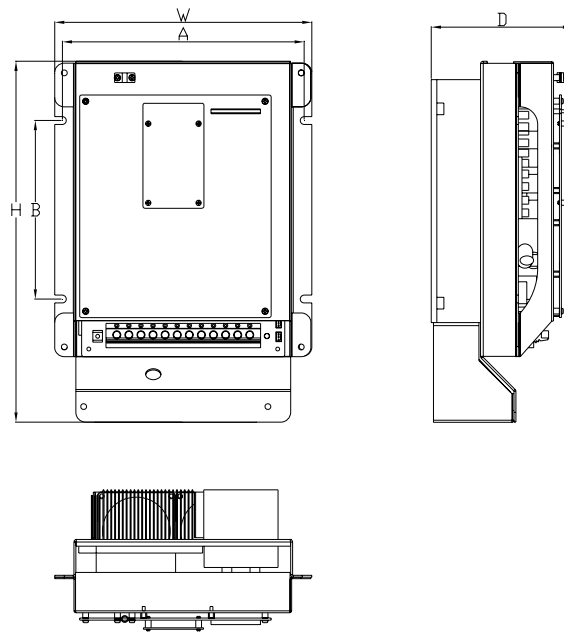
Installation Dimension of Elevator Integrated Drive Controller (no casing)
